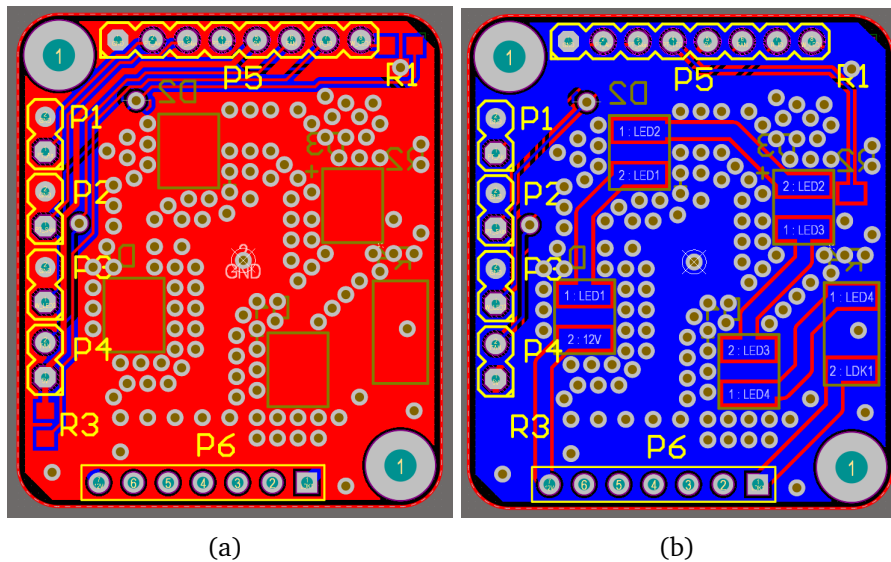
(a) 2D top-view of the LED-PCB (b) 2D bottom-view of the LED-PCB
